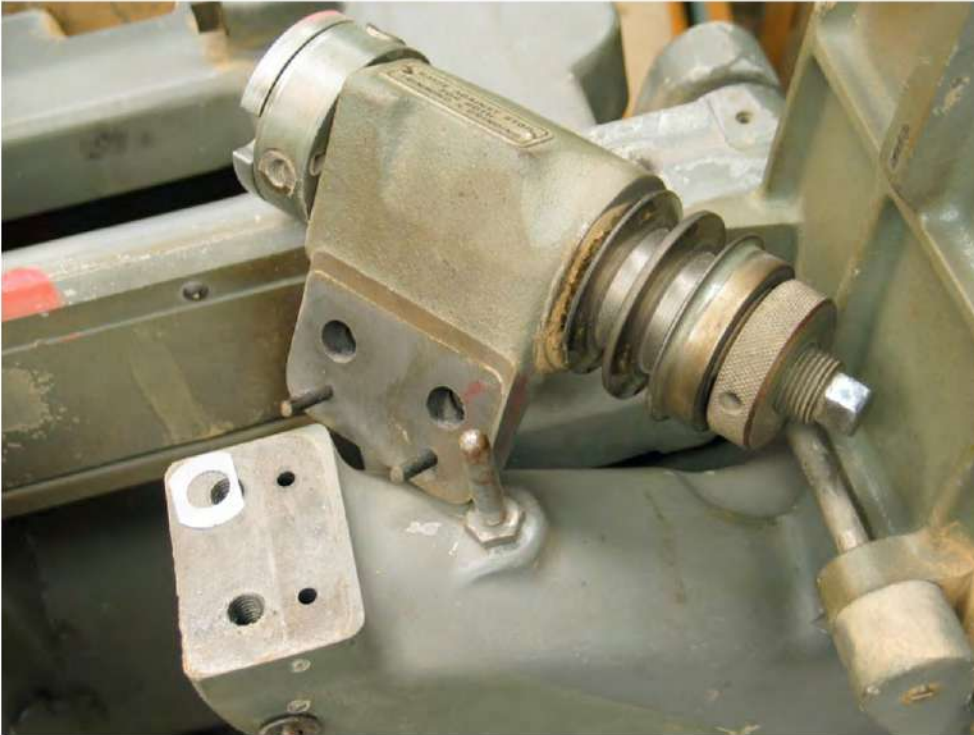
The two holding bolts were removed and the nuts holding the locator pins were screwed in (Tightened) to draw the pins back out. Note the shim. Mark its location for accurate re-assembly.
